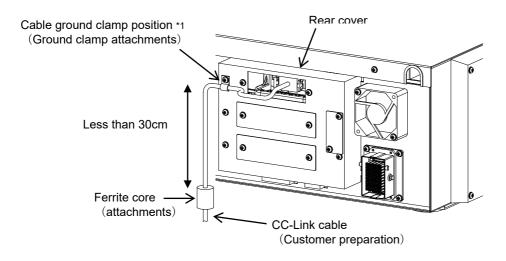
Connection of the CC-Link cable (CR2D -700 controller)
